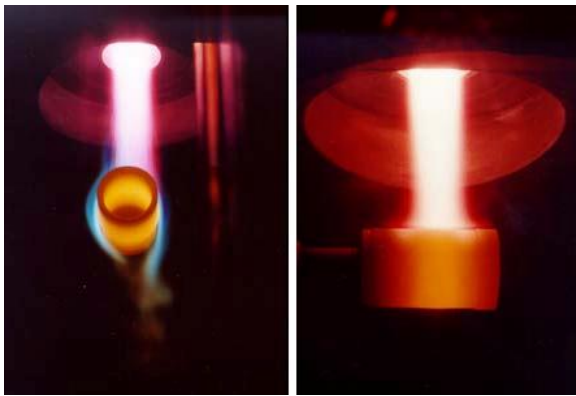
Plasma surface welding of elements with refractory materials
